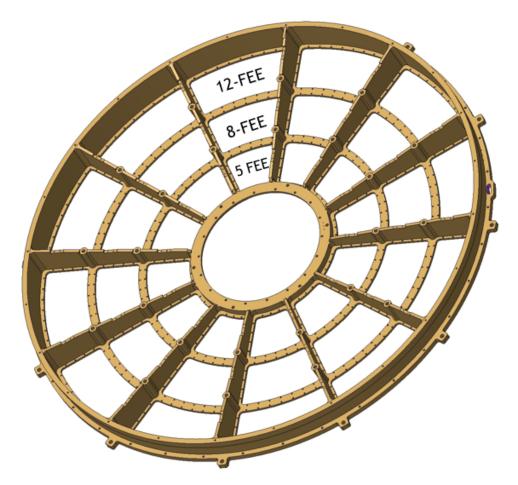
The TPC "wagon wheel" shall be machined from single piece Al to eliminate cracks and minimize leaks.
